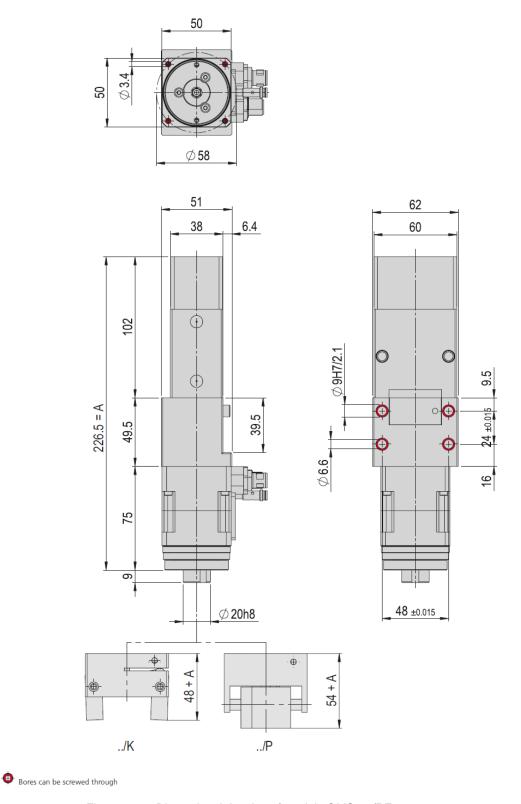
Dimensional drawing of module GMQ 32/RE-50
